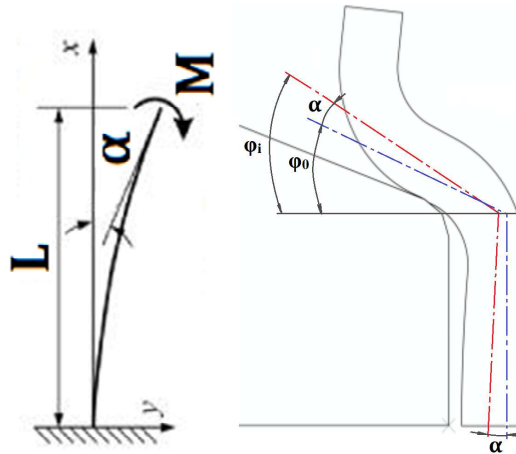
V section on flange (a) no deflection on pre-assembly and (b) deflection when the clamp tightened.
